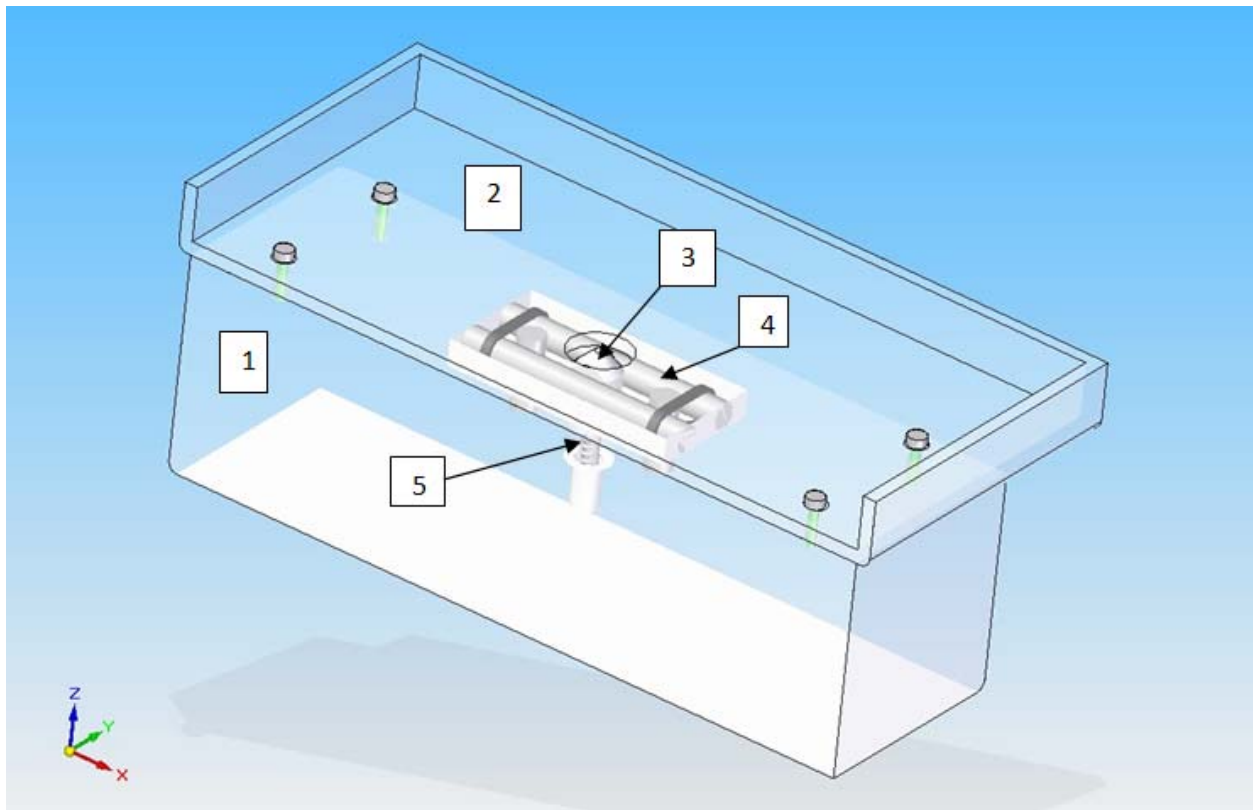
Solid Model of Medium O-ring Fixture (Final Design)
